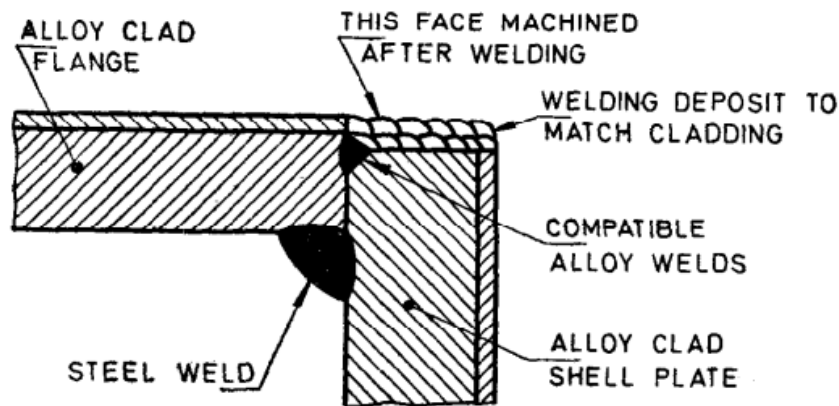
ALLOY CLAD FLANGE ON CLAD SHELL
